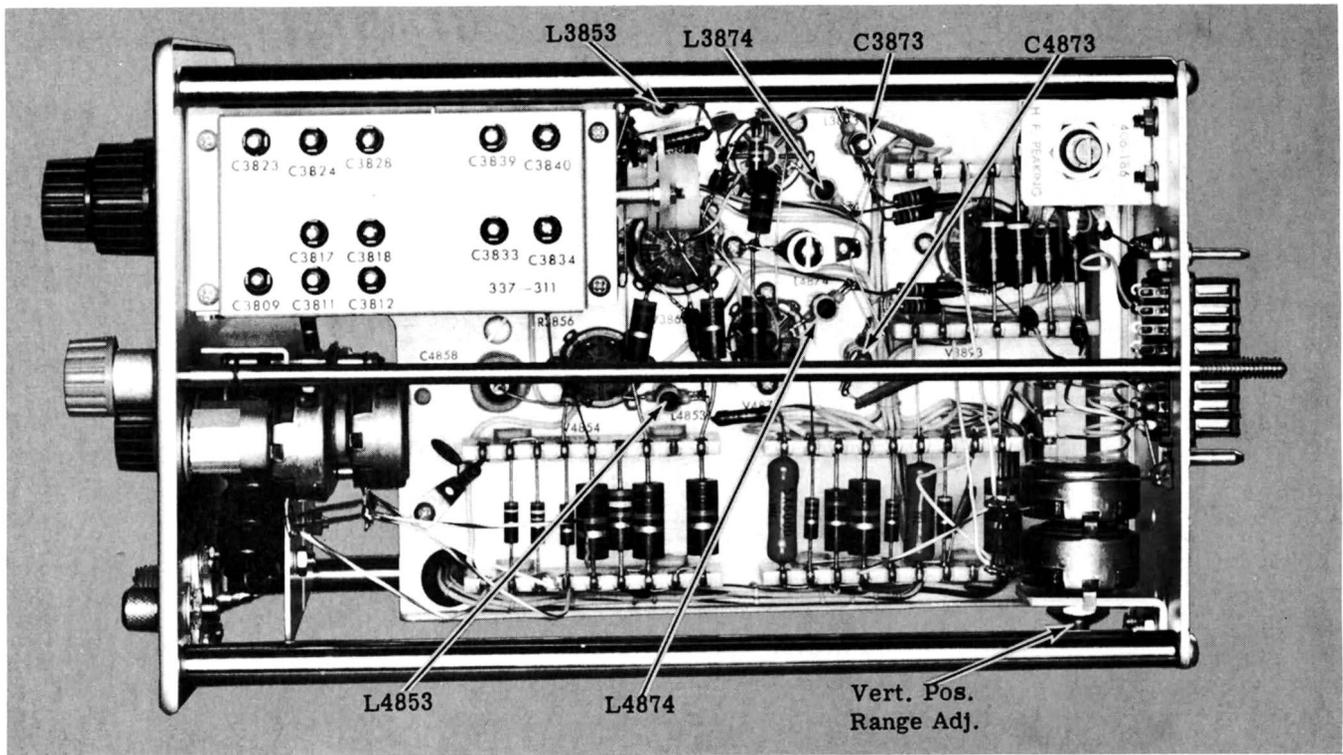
Bottom view of Type H Unit (SN 1790-10,000) showing the location of adjustments.
